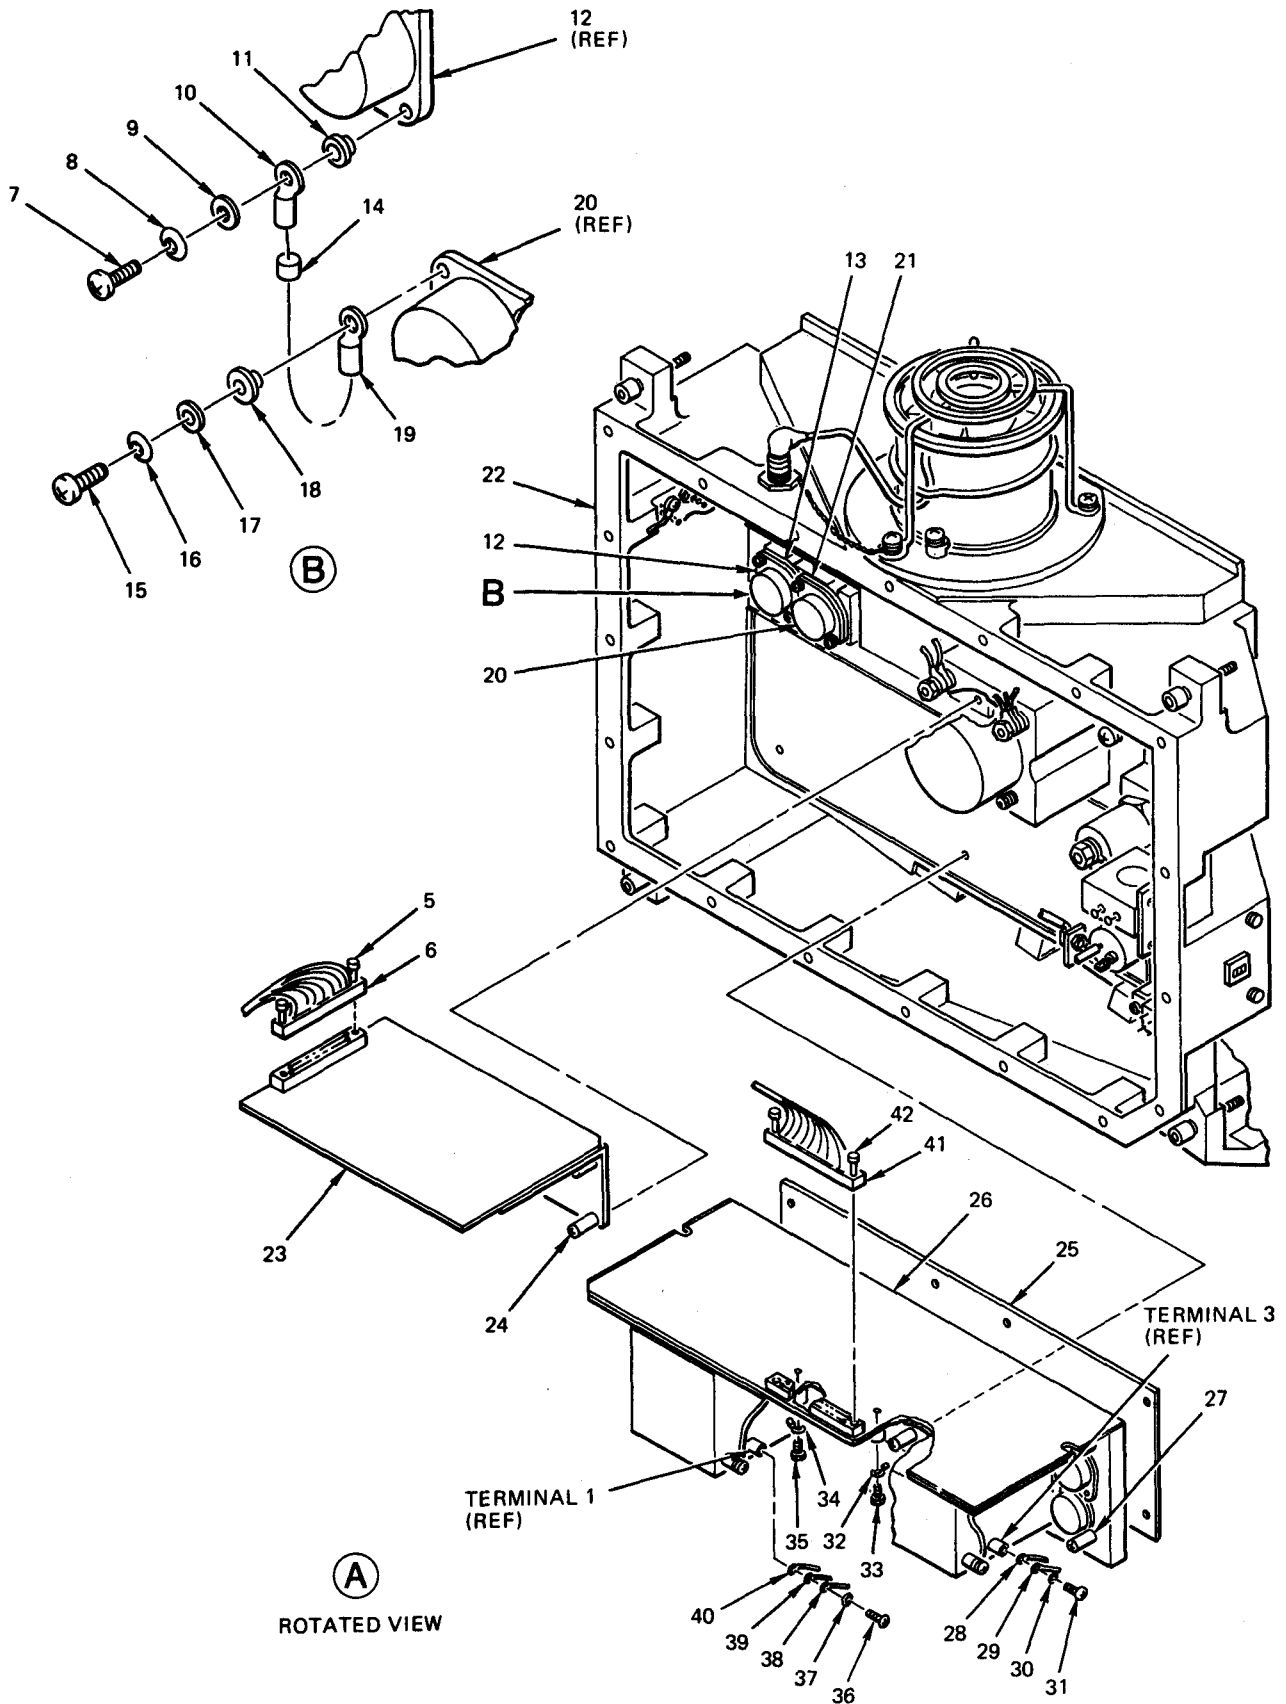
Power Supply Exploded View (Sheet 2 of 3)
